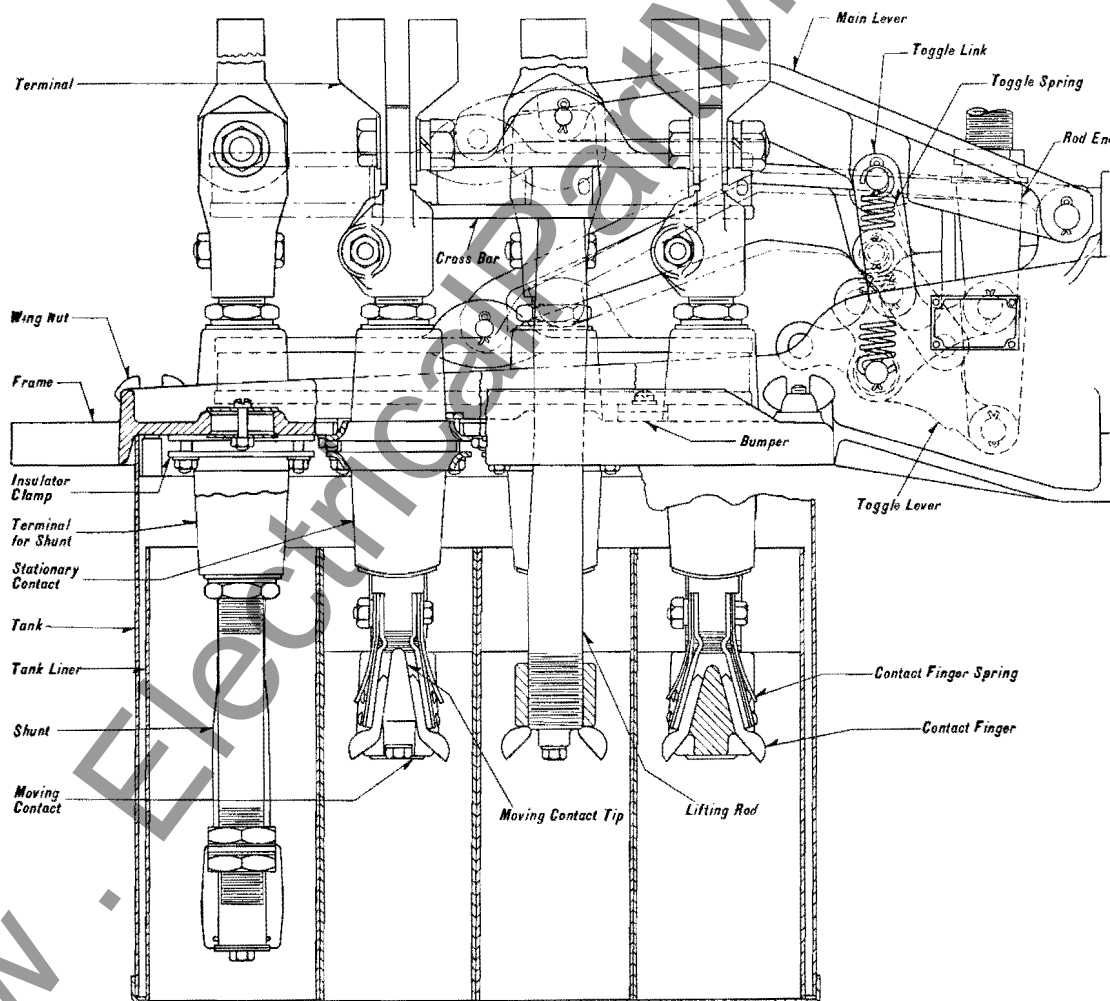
800 AMPERE CIRCUIT-BREAKER UNIT
